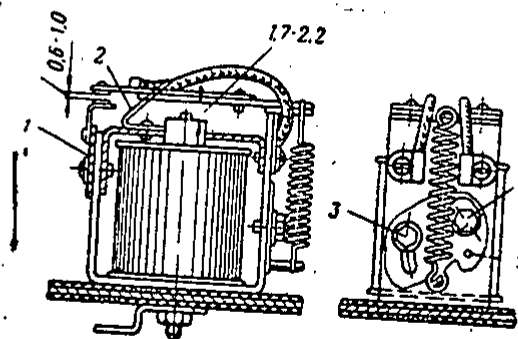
1. - plates; 2. - attaching stop screw; 4. - cam
